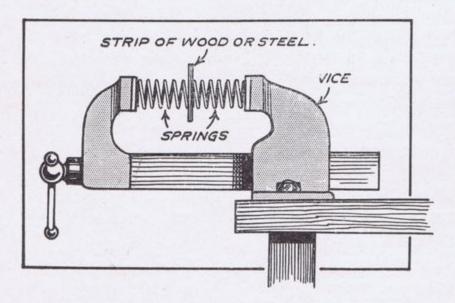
How to test Springs for Weakness. Weakness of spring is indicated when one coil binds or closes before the other.
